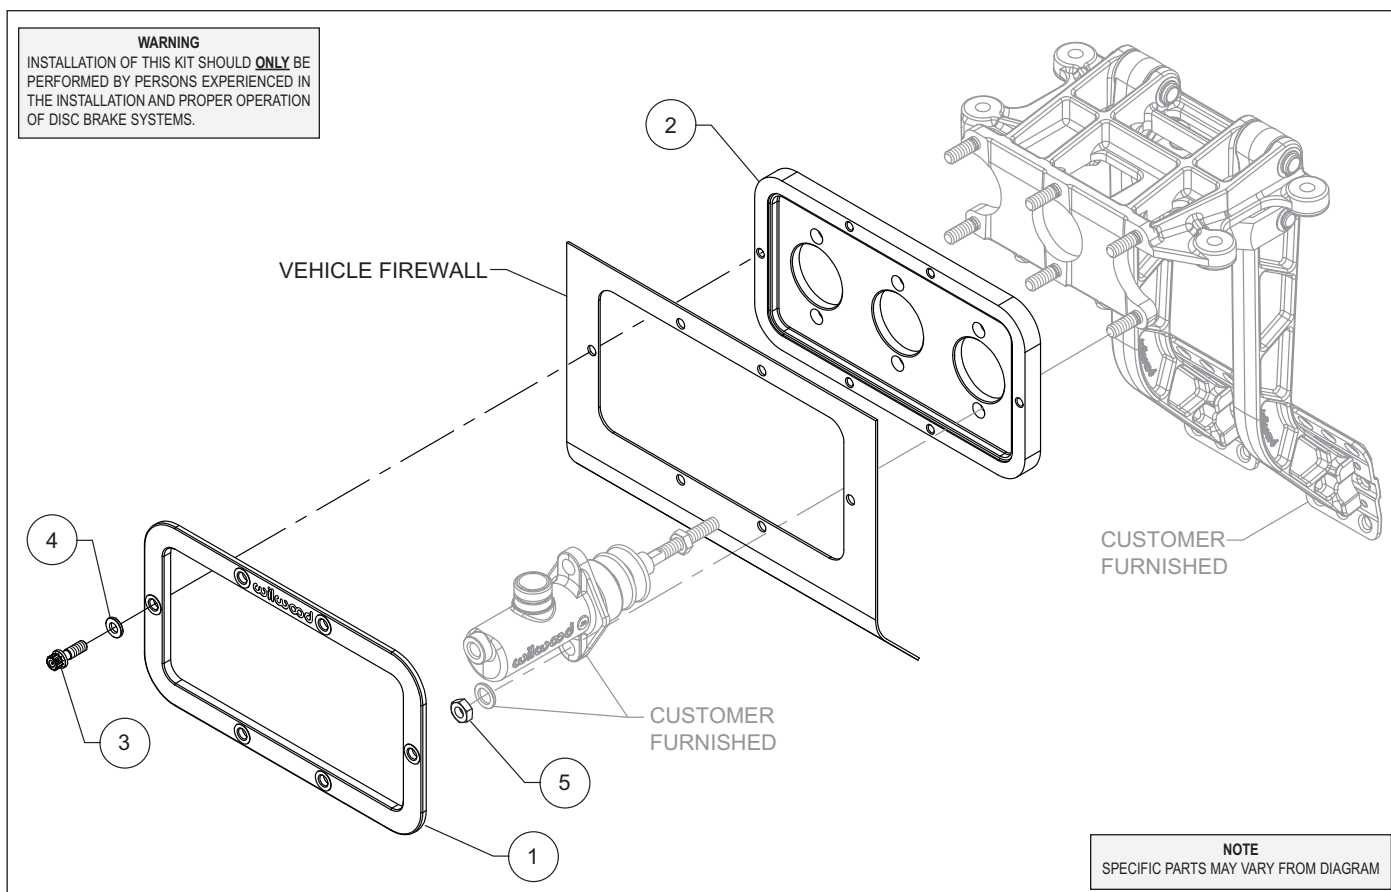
Master Cylinder Firewall Mounting Kit Installation
